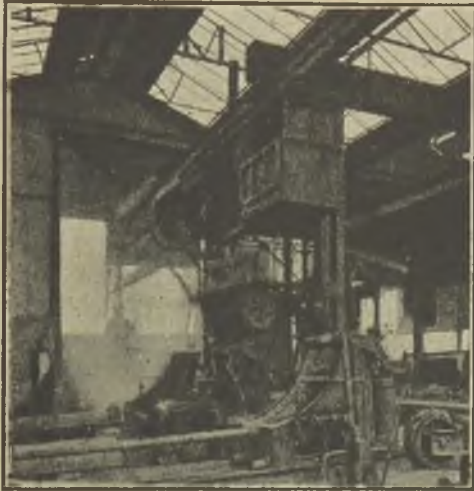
A.—CENTRIFUGAL CASTING MACHINE.
